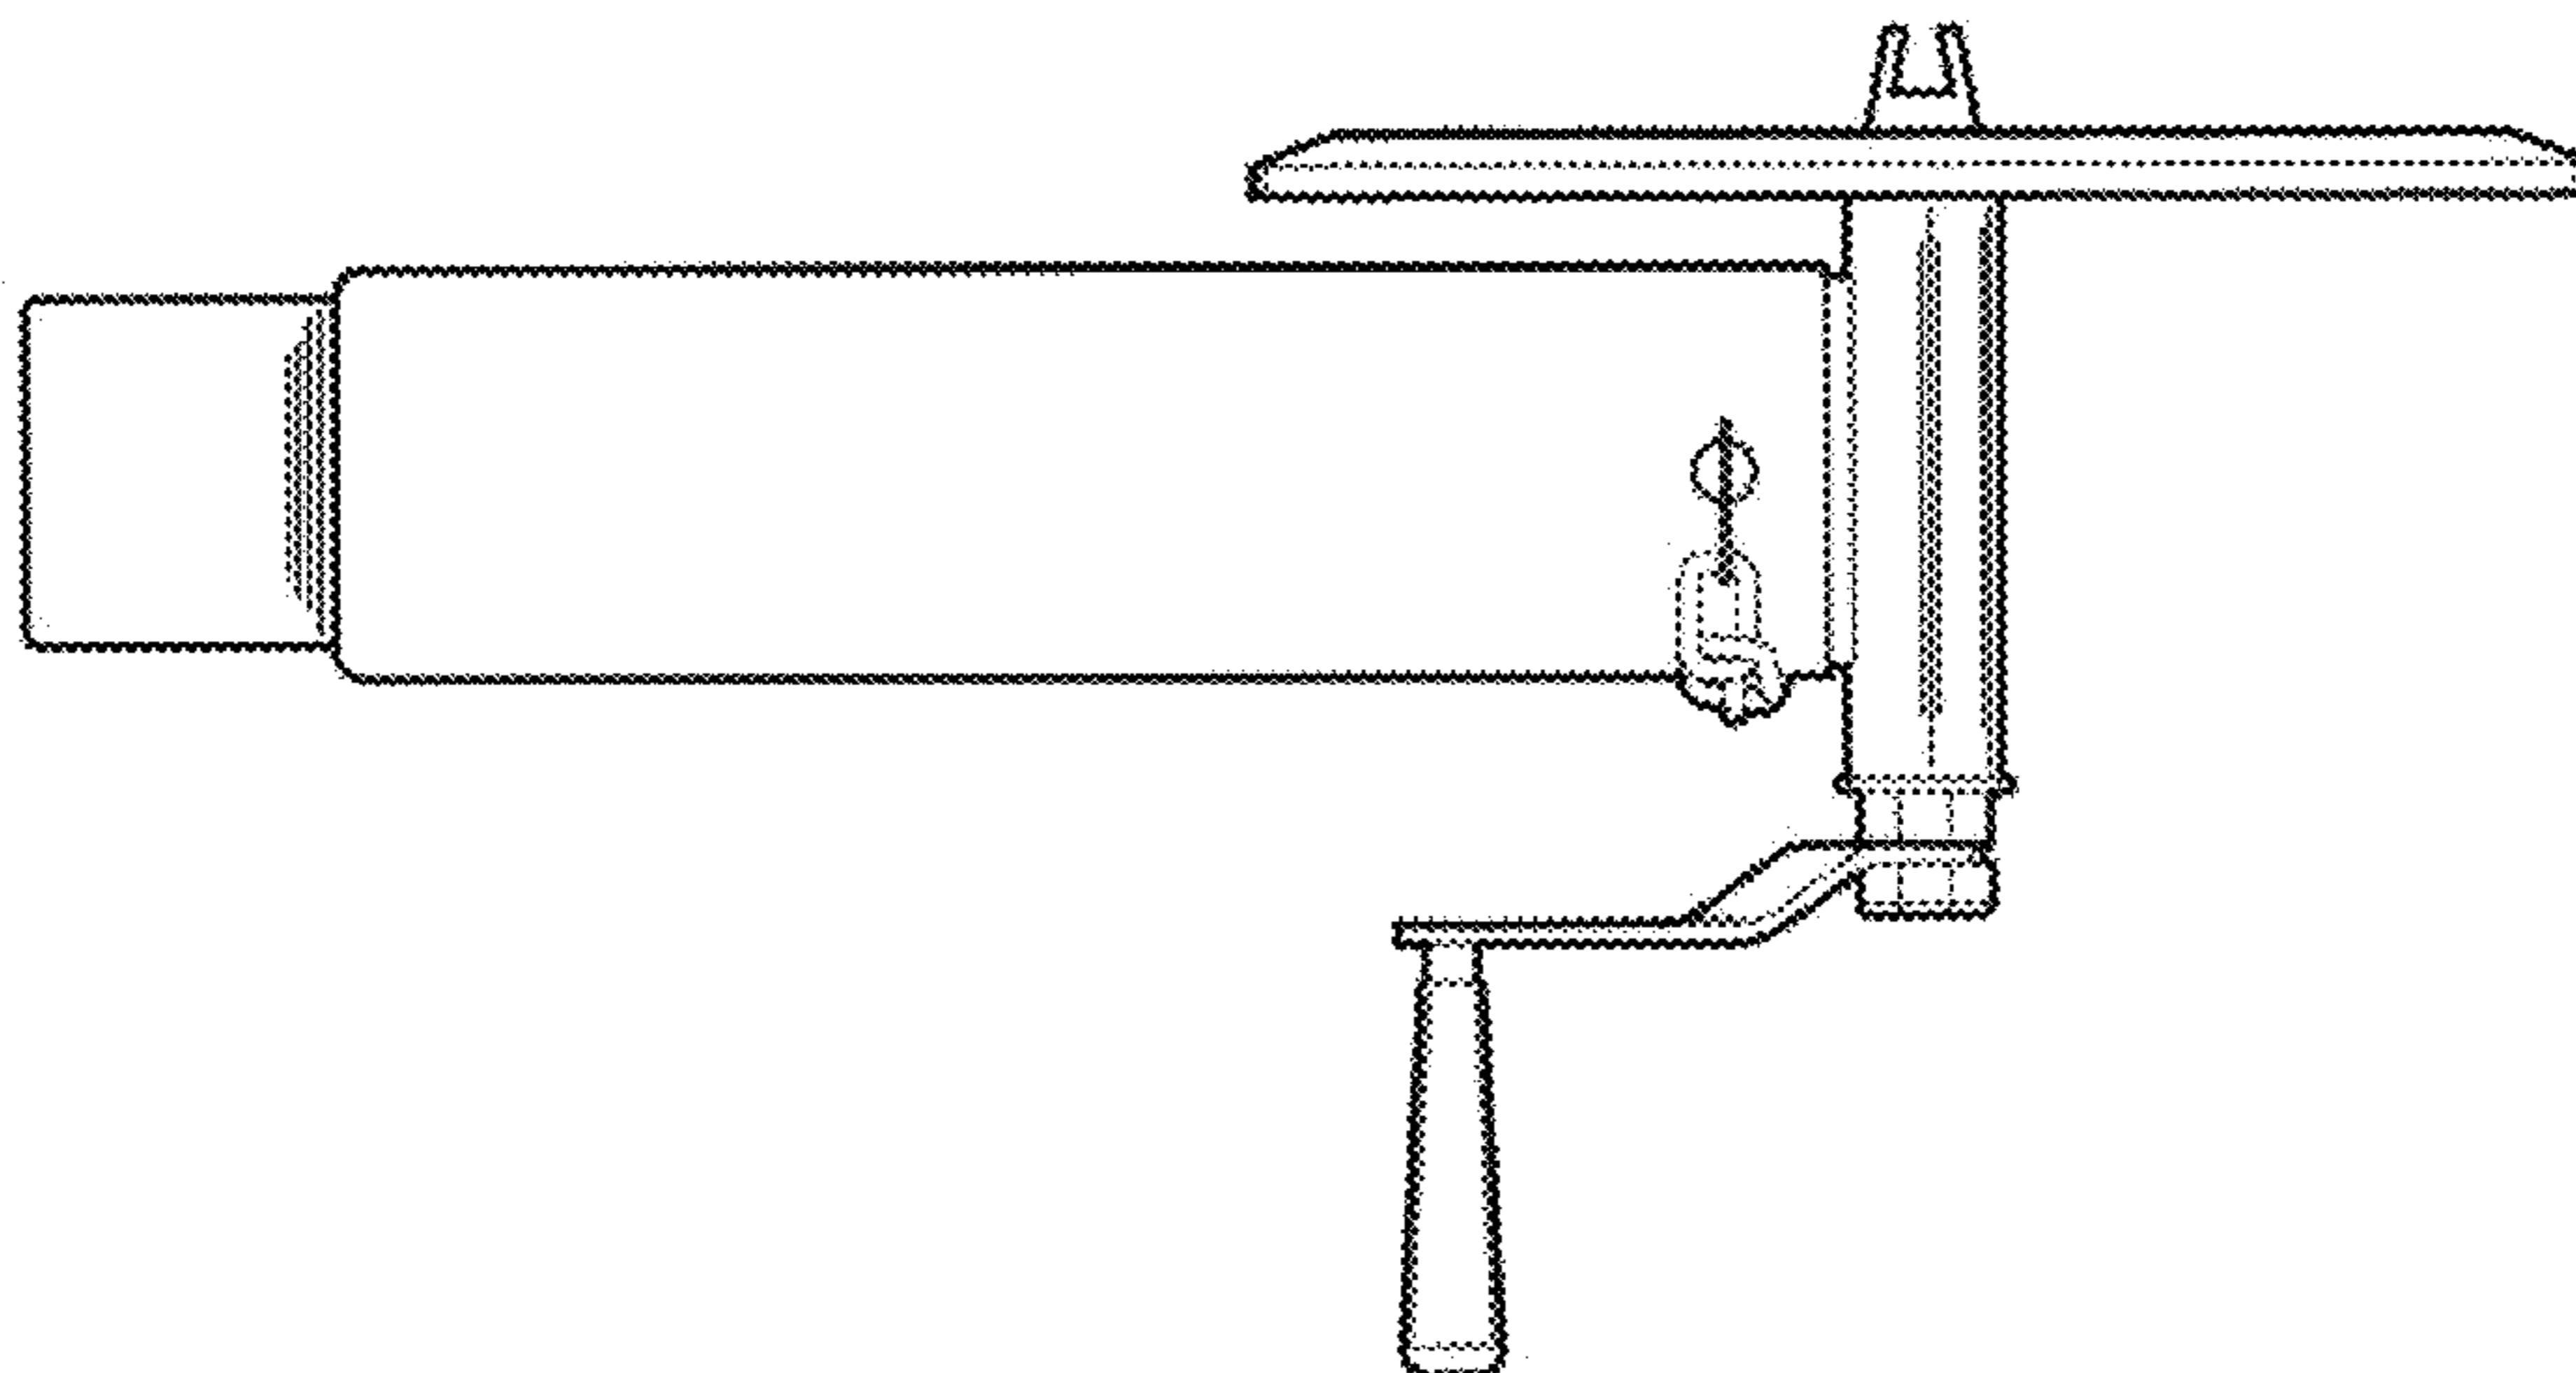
is a partial view of FIG. 3 with the boss retaining a strap guide. The strap guide is not part of the claimed design.
